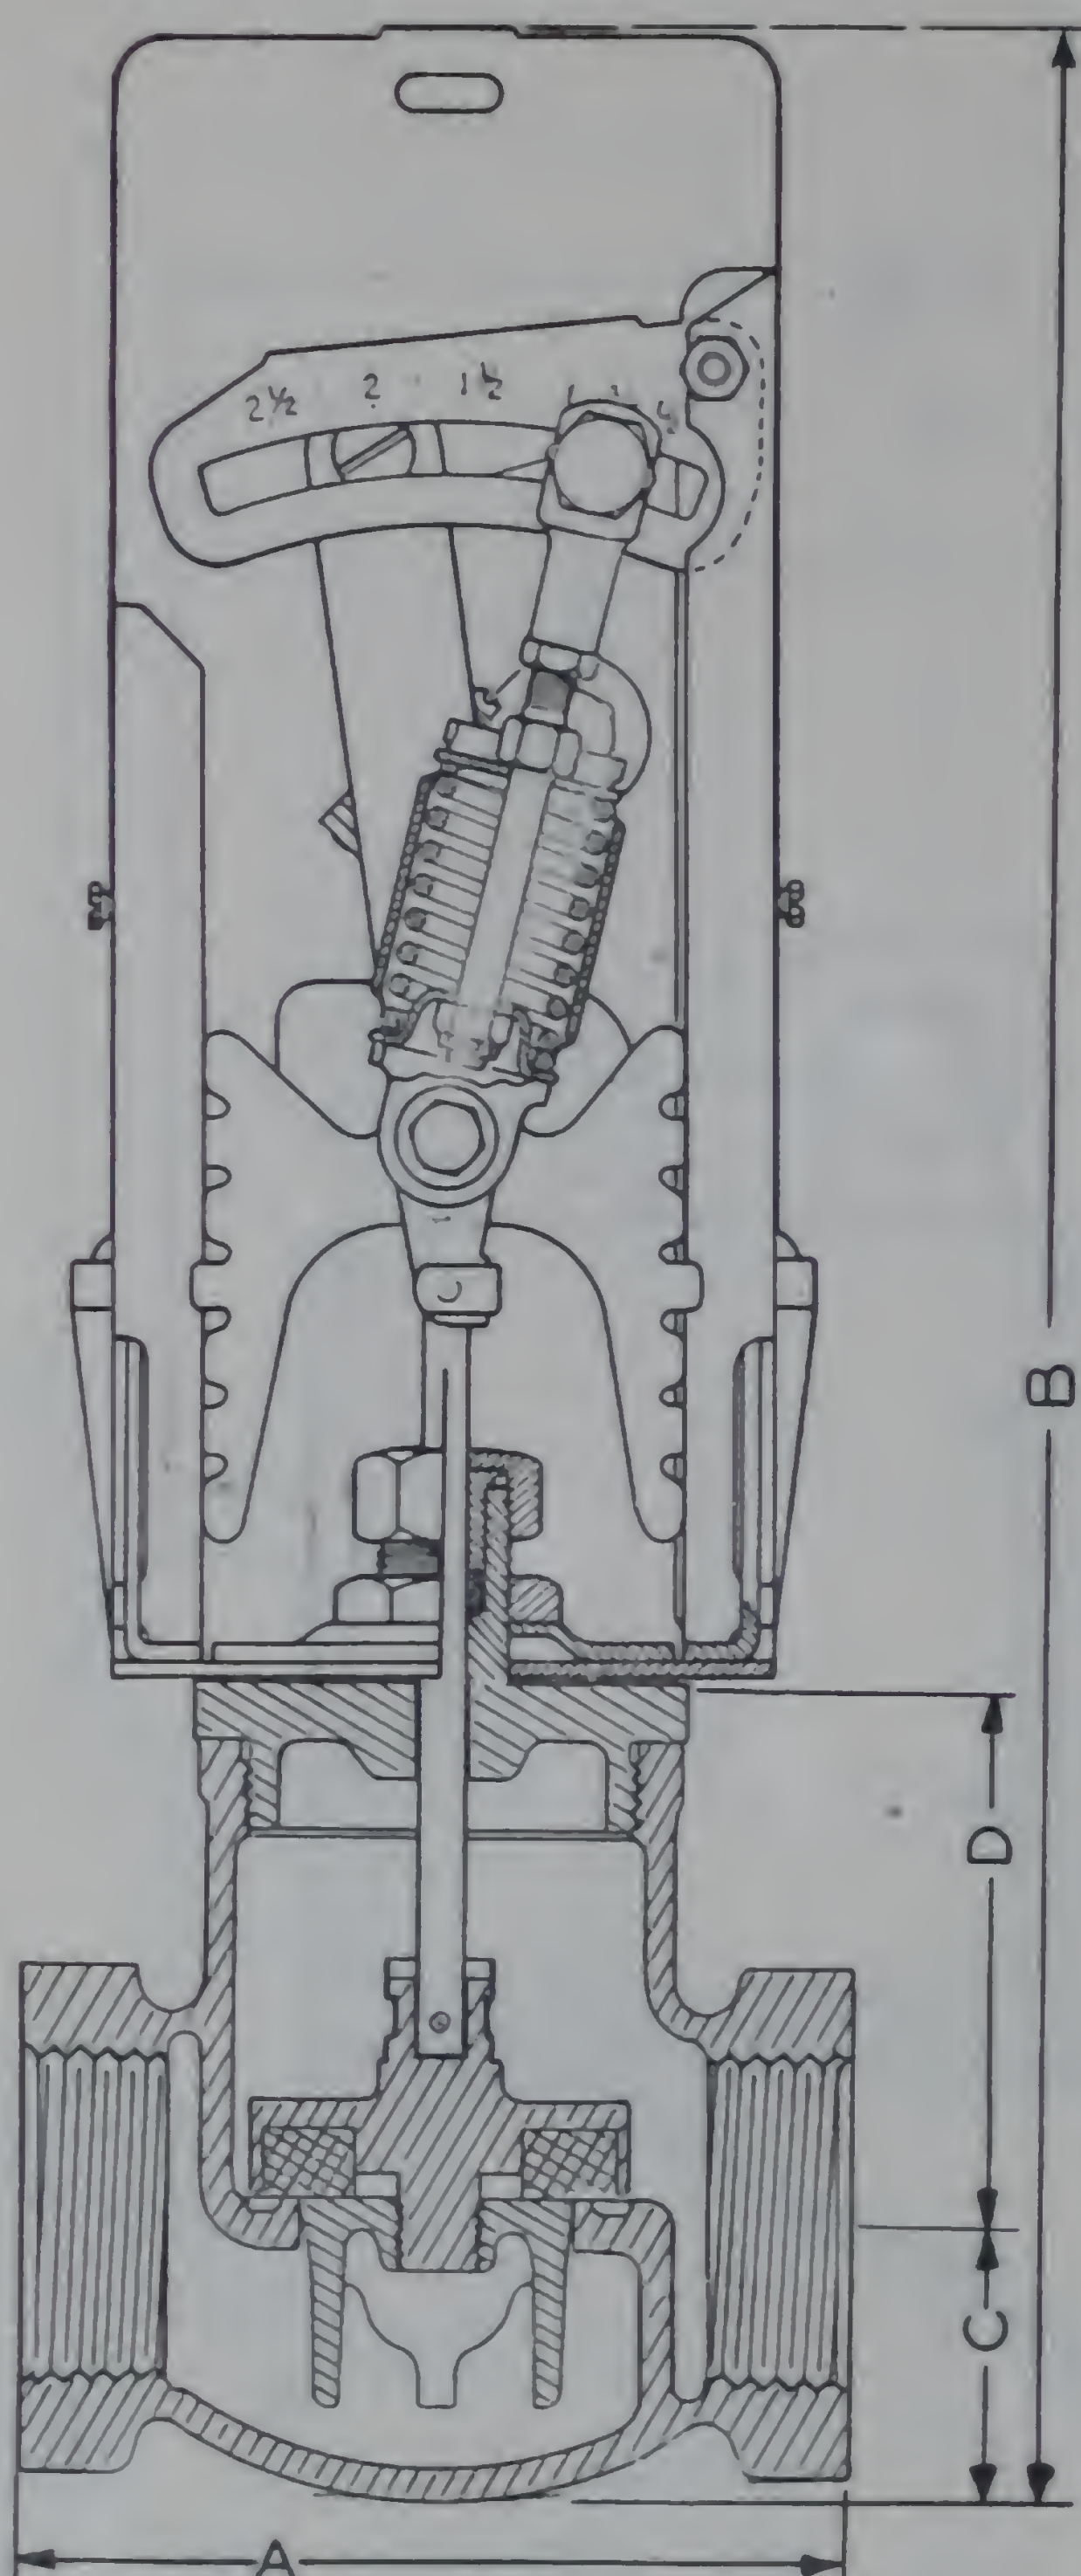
Dimensional drawing of screwed type K900B Motorized Valve
